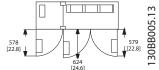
Space in front of IP21/IP54 enclosure type, frame size F2
